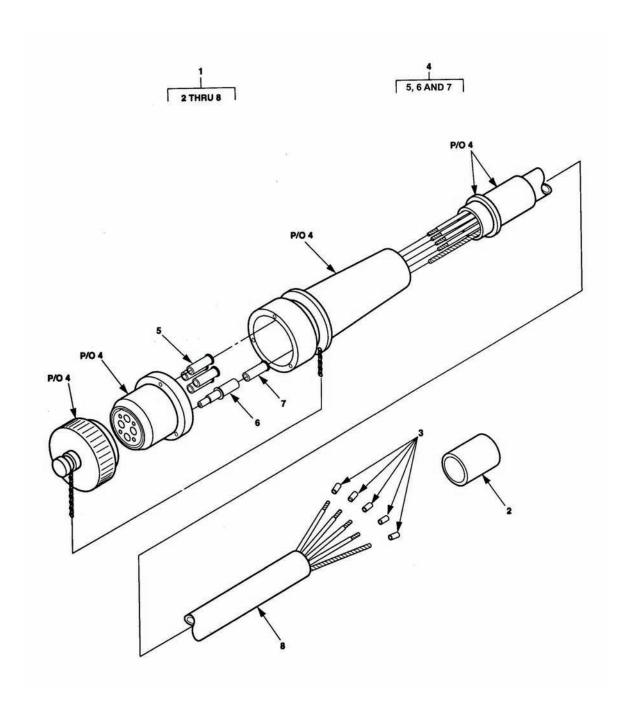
Cable Assembly, W19, AN/MJQ-39.
